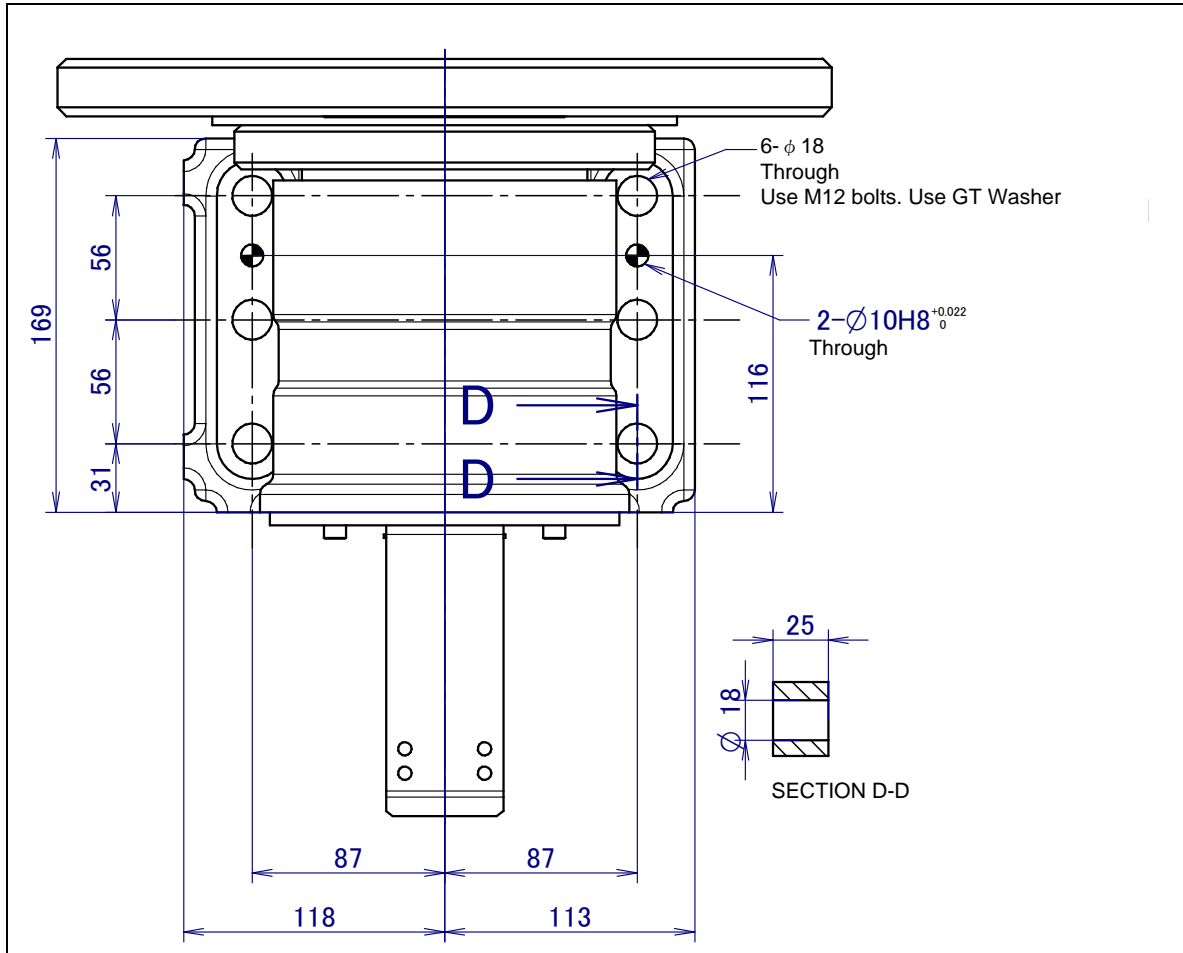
(e) Dimensions of the base of the positioner follower unit (insulated flange)
